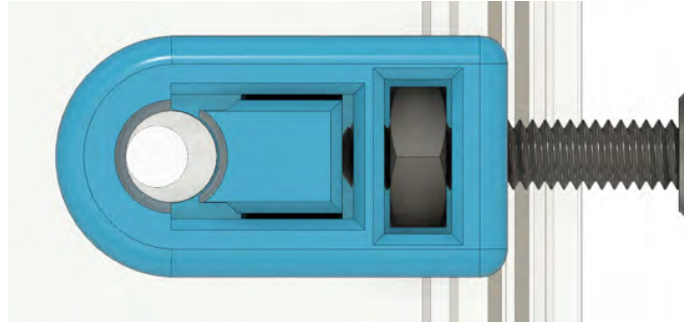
Align the drilled hole with the edge of the clamp hole farthest from the slide and bolt. This will prevent pinching if the hole sizes differ significantly.
